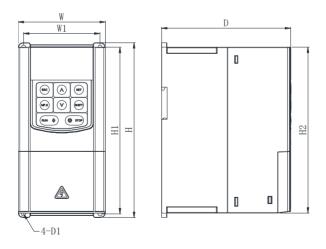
Outline dimensions and mounting dimensions of MS10 series 4T1.5B-4T22B
